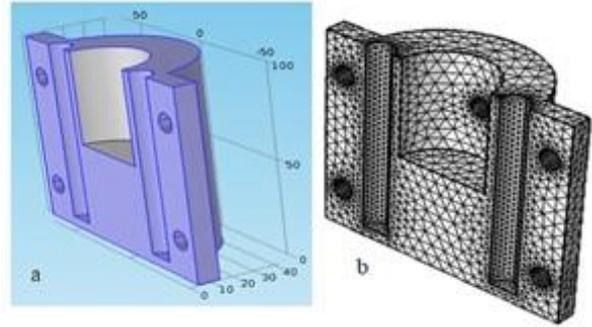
Cast piston permanent mould on (a) Movable half of mould; (b) discretized mould
